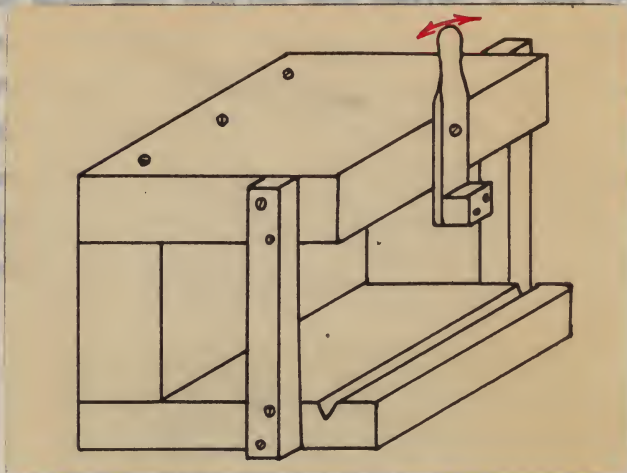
Fixture For Holding Workpiece In Vertical Position
